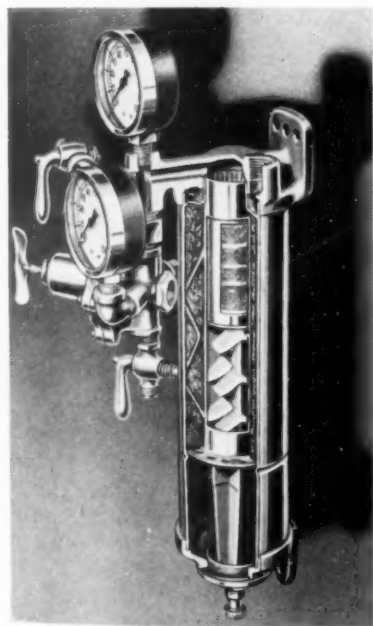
Cut-away view showing copper shavings, baffle plates, and filter pads.
